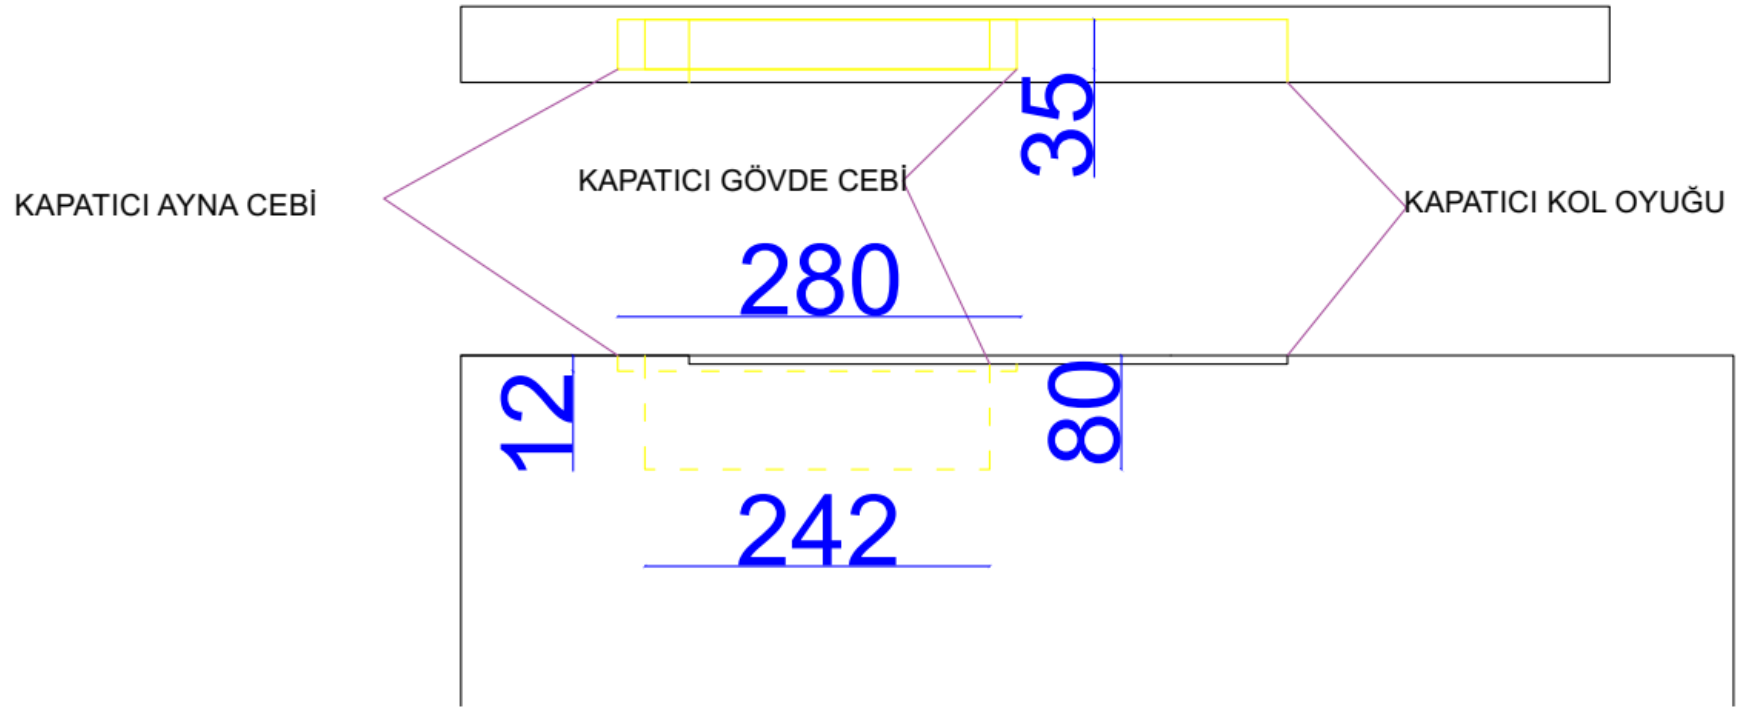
Door leaf closer gap for Door No. 1 and Door No. 2
